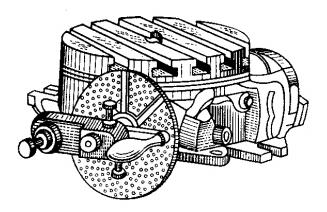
A rotary table which can be clamped or mounted on the machine bed.
